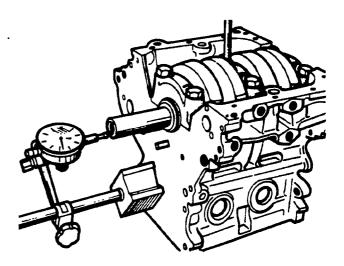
CHECKING THE CRANKSHAFT END PLAY
